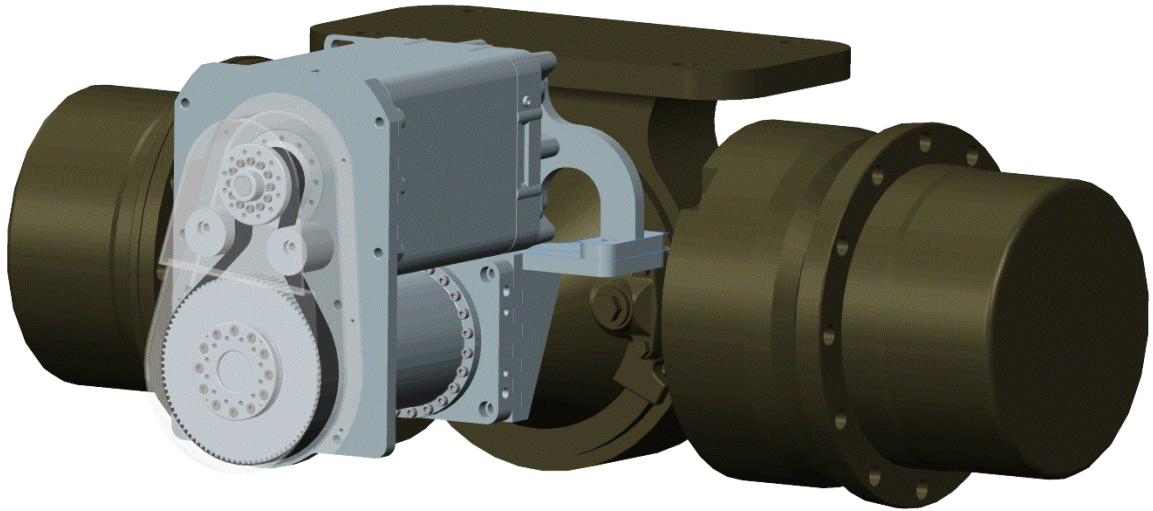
Front axle drivetrain from electric motor to wheel hubs.
